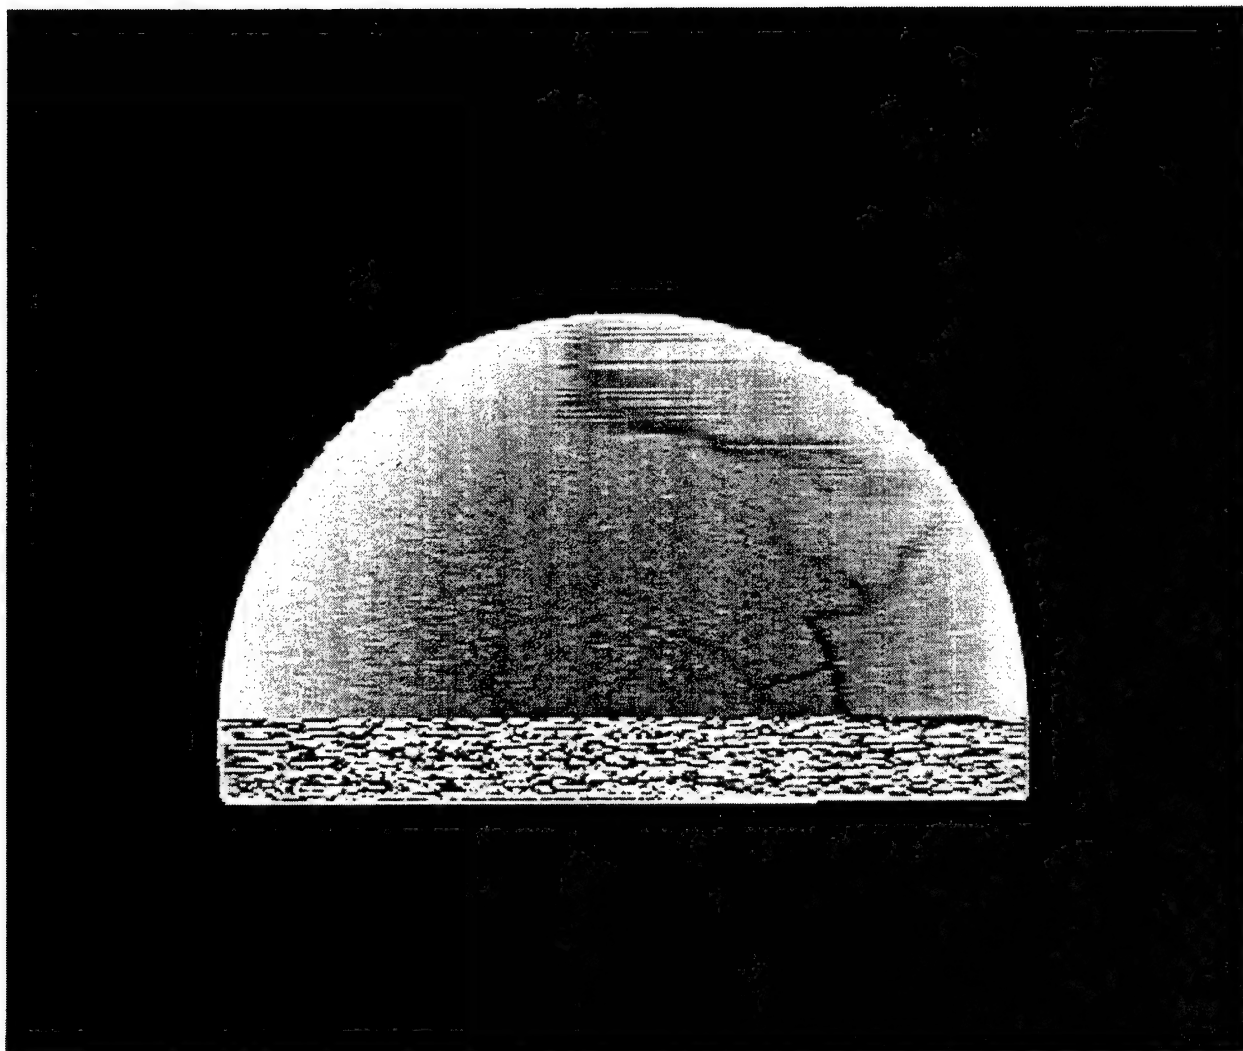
16.27 mm from bottom of disk with 65° rotation about X-axis.
